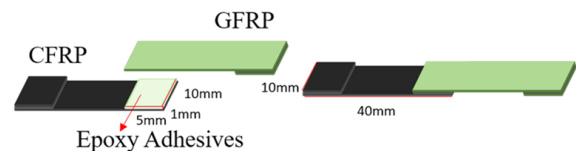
Schematic arrangement of single lap shear specimens: Size of specimen.
